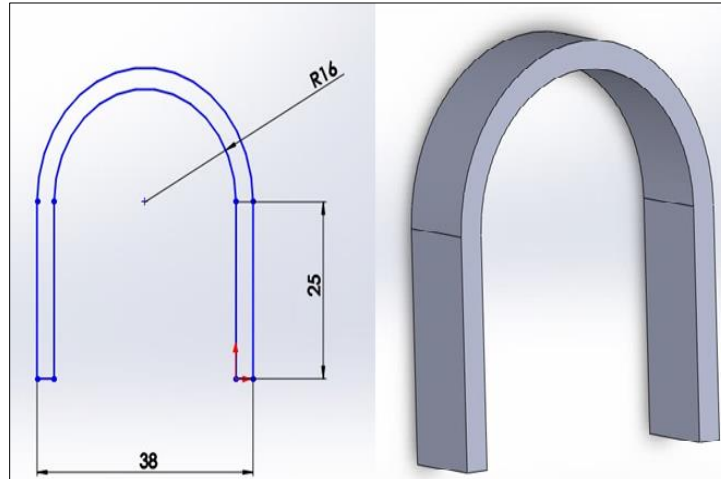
The dimension of standard U-bend specimens used in SCC testing
